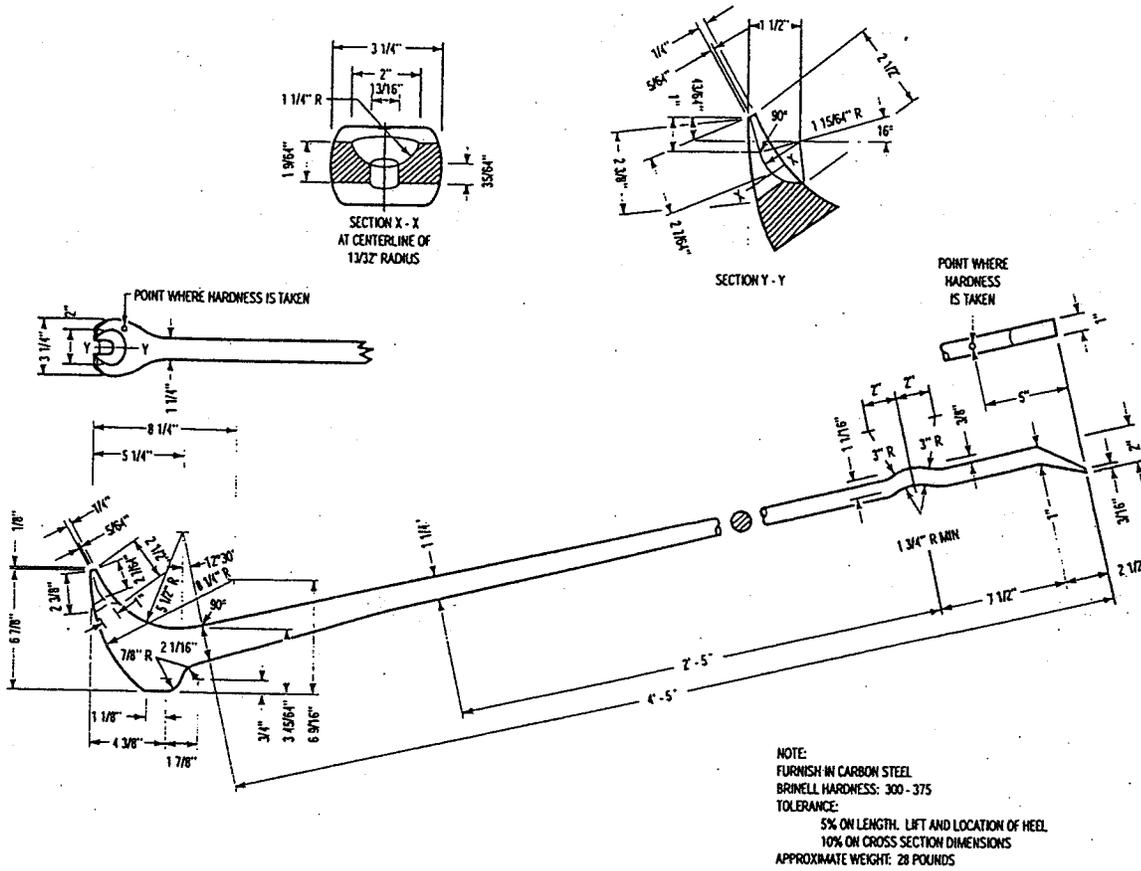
Plan 11-97 - AREMA Claw Bar
